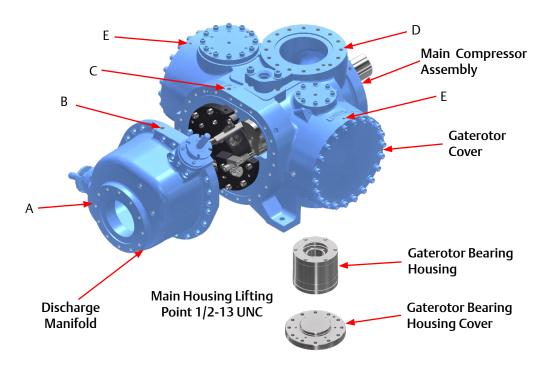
Bareshaft Compressor Lifting Points and Component Weights
